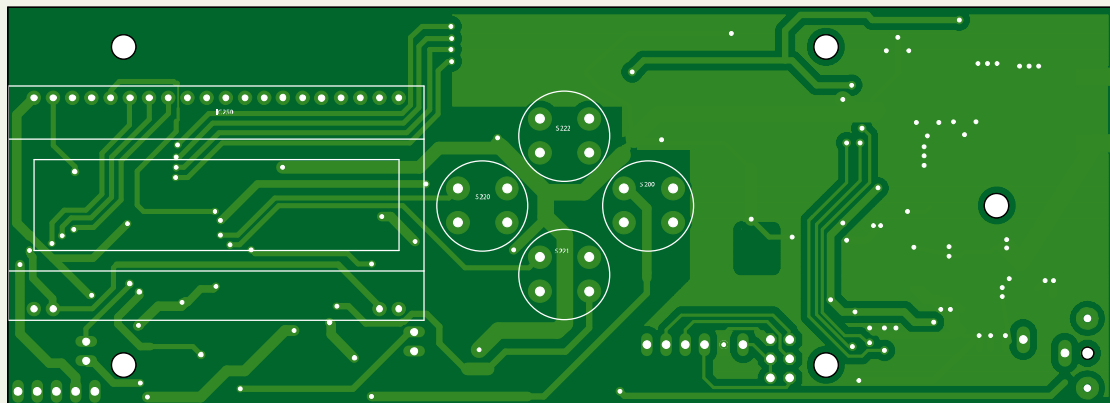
The PCB layout with exclusively SMD components on the bottom side. Only the buttons and the display module are located on the top side.
